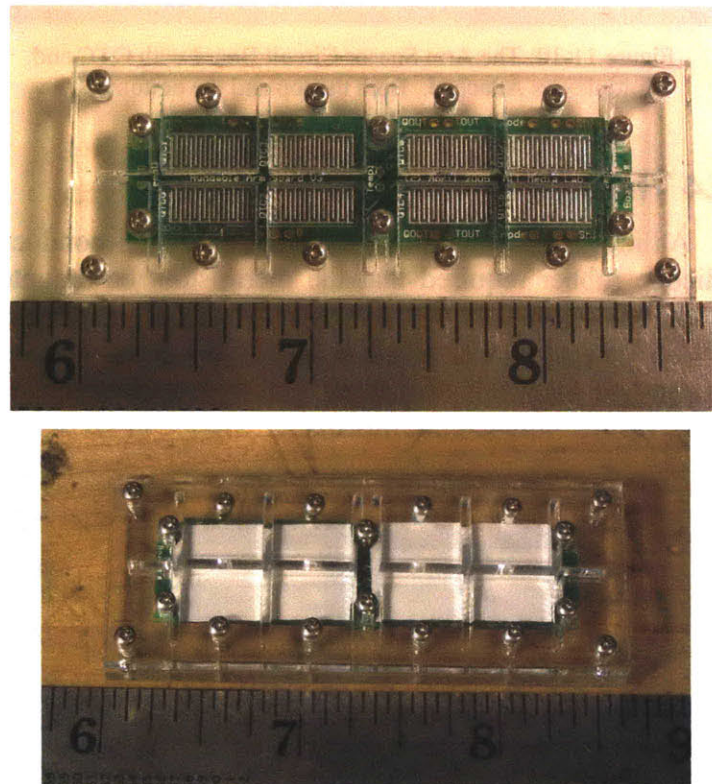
The QTC Cutting Template. At top shows the location of the cutting guides with respect to the electrodes. At bottom is the actual sensor board with QTC mounted prior to being cut.
